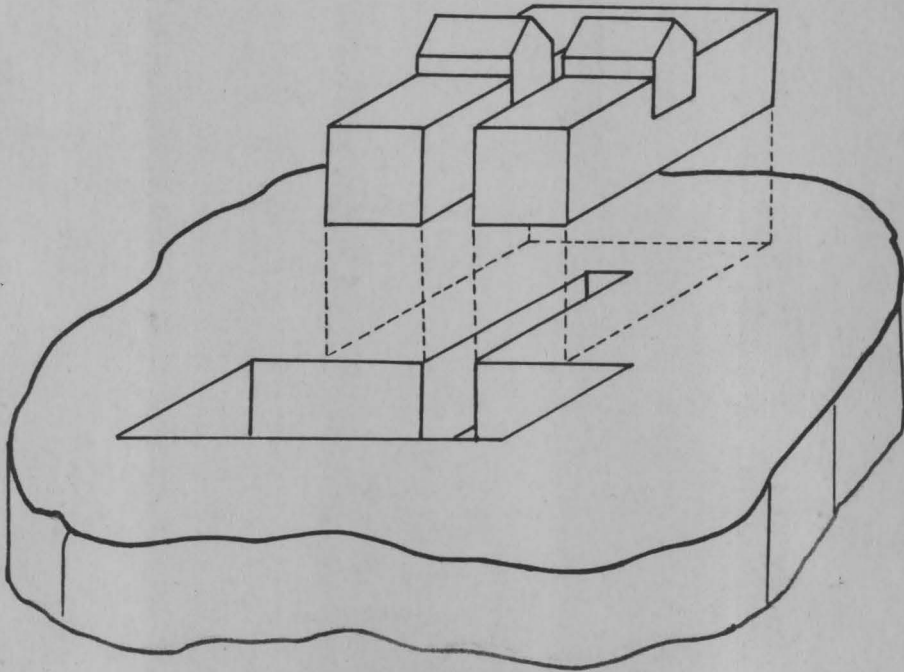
KNIFE EDGE ASSEMBLY SHOWING POSITION OVER HOLE IN SUPPORTING PLATE
